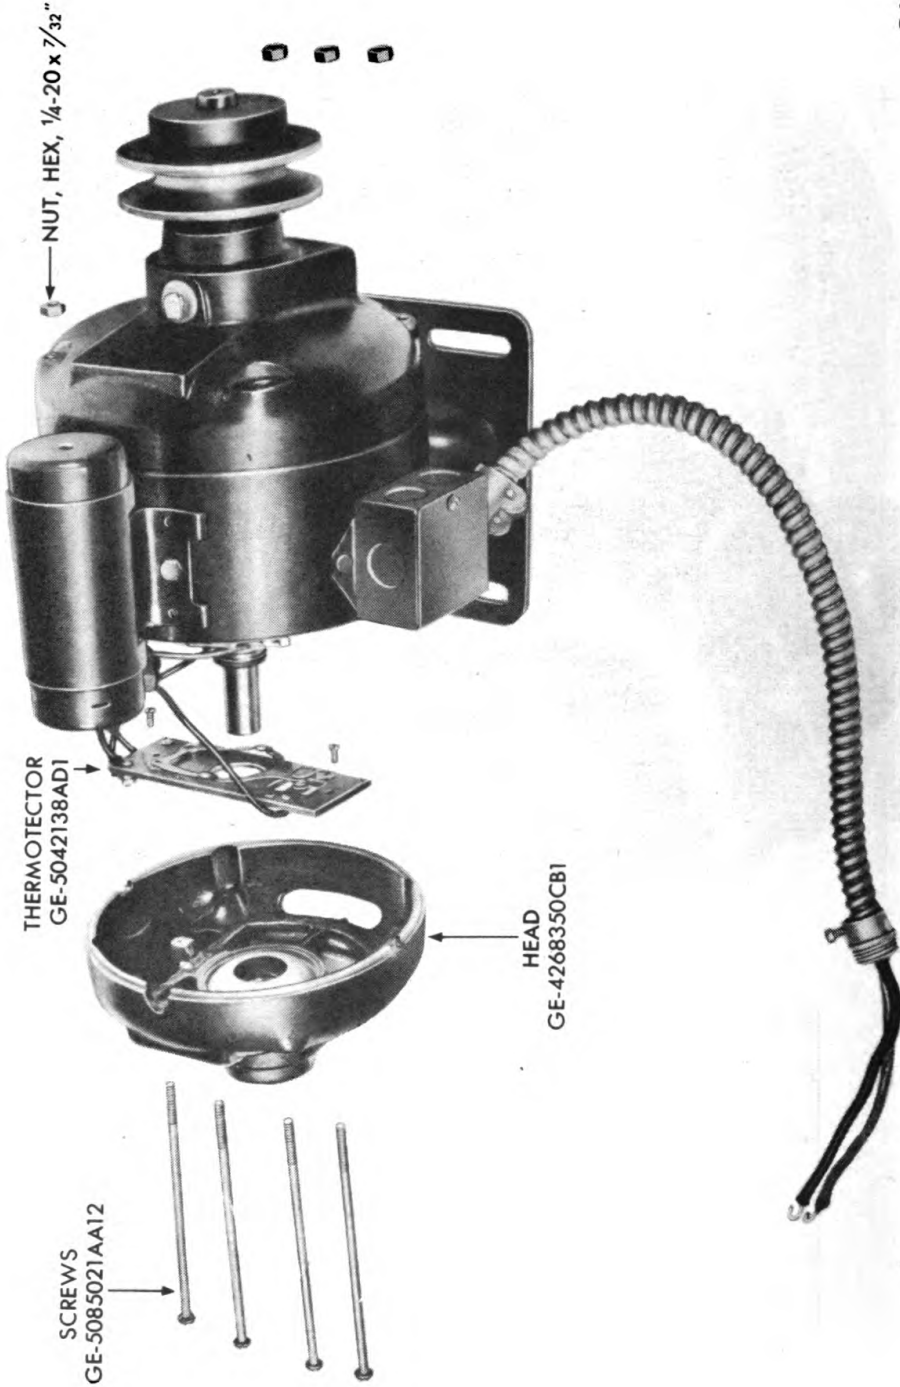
Air Compressor Motor — End Plate and Thermotector Removed
